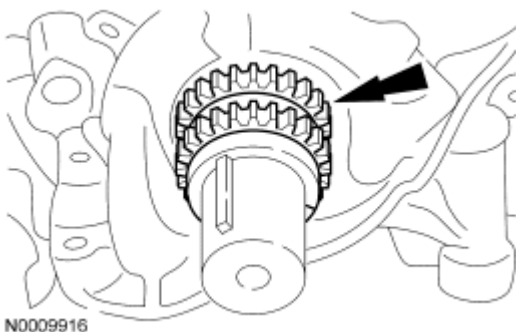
Locating Crankshaft Sprocket With Timing Marks Out
